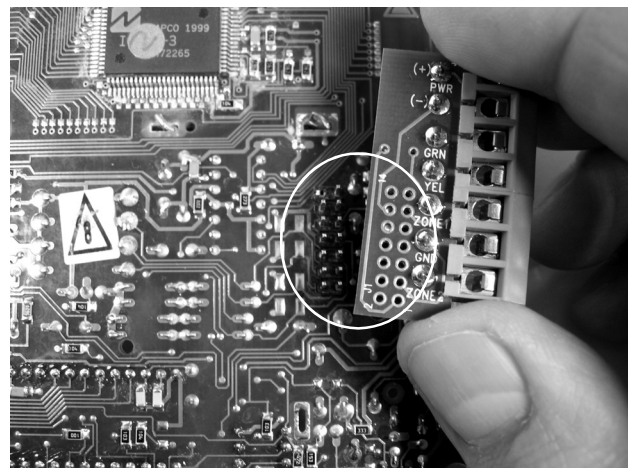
The pins on the PC board match the holes in the terminal strip (circled)
